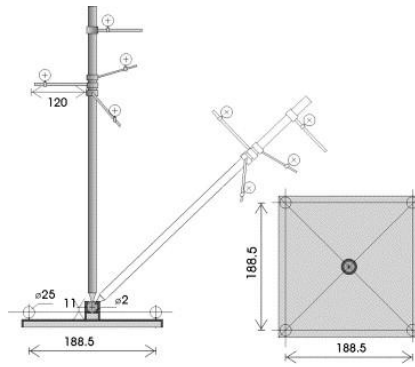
Mechanical linkage front view (left) and top view (right) used by Camomilla et al. [16]
